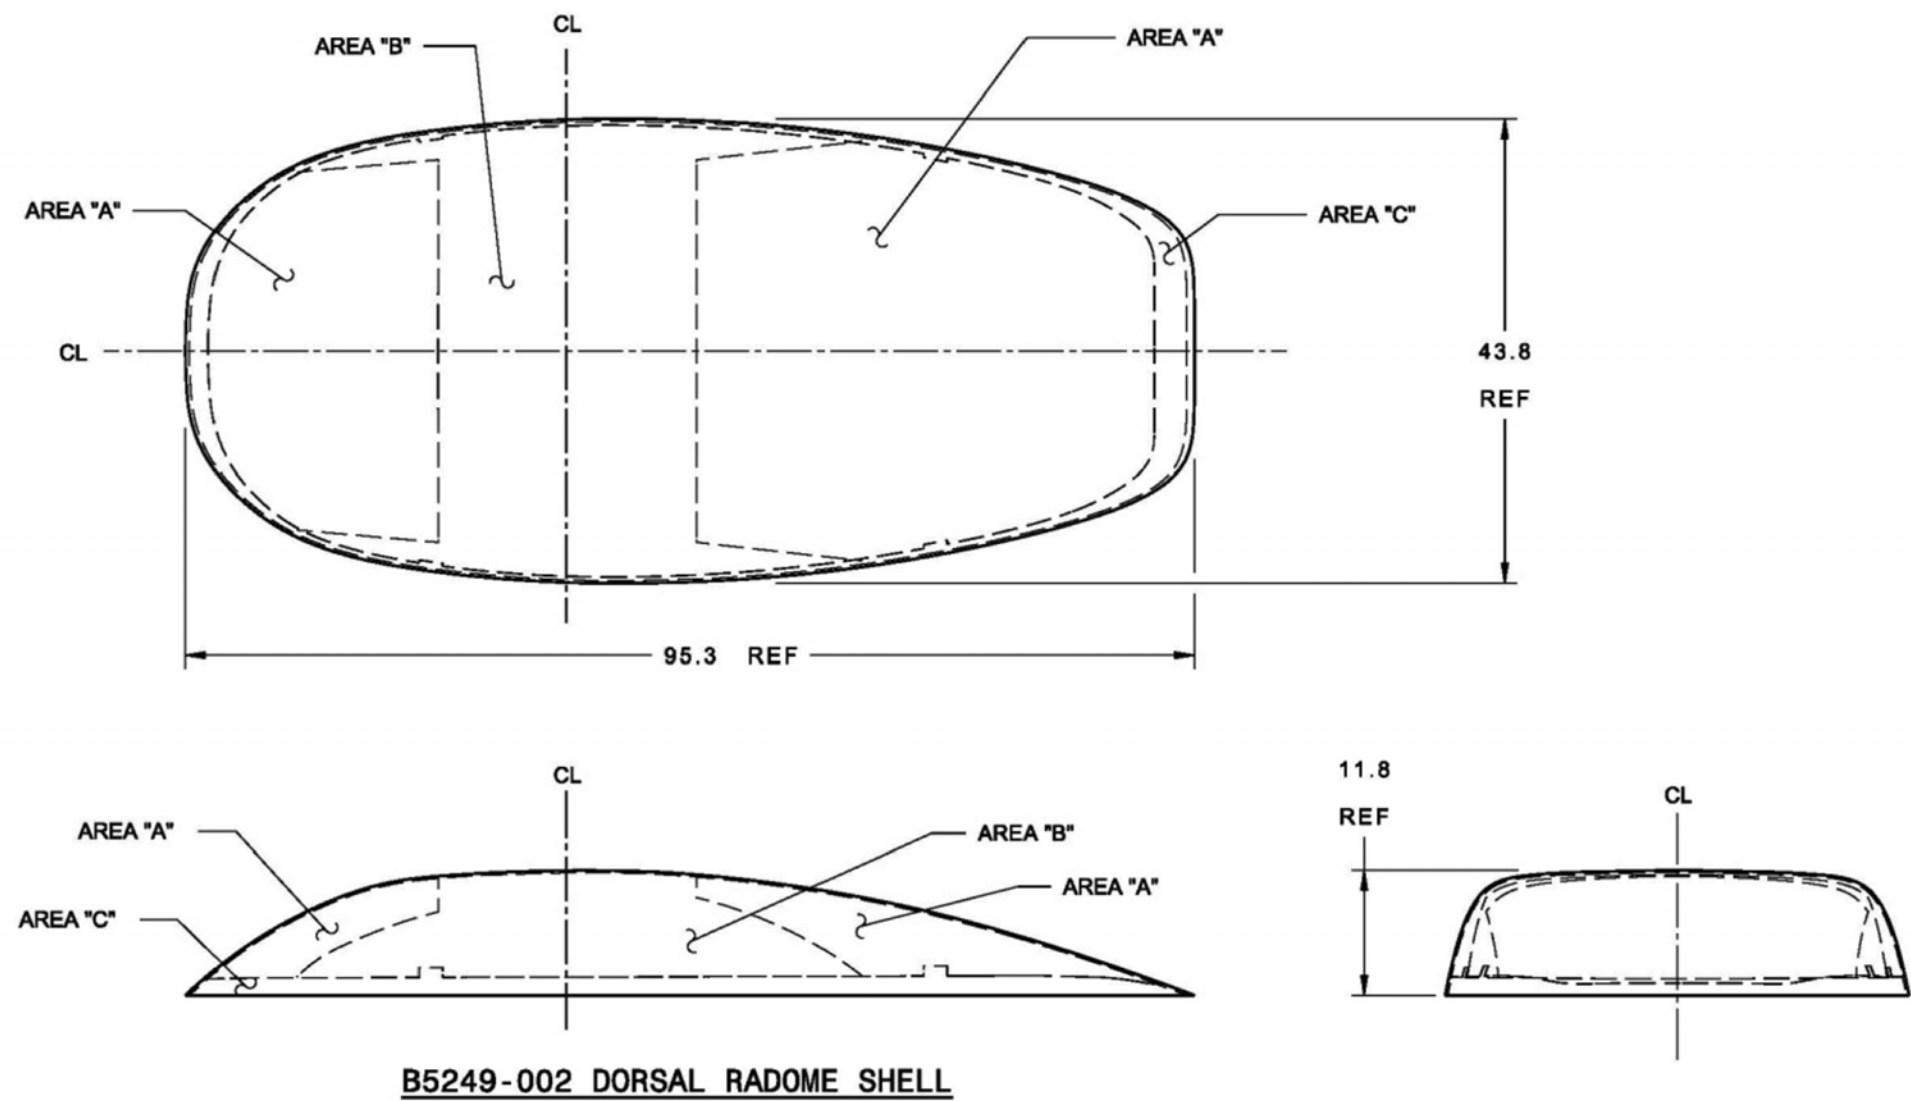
(Sheet 4 of 6) Fuselage Mount Radome Outline and Installation Drawing (90401395, REV D)
